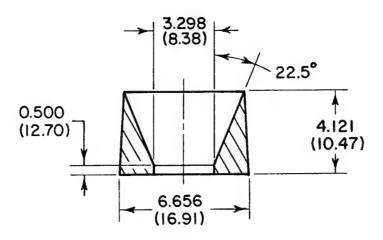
MANUFACTURED DIMENSIONS OF EXTRUSION LINER AND DIES Both were fabricated from H-l1 tool steel and heat treated to obtain a hardness of R  $_{\rm c}$  53/55. All dimensions in inches (centimeters).
